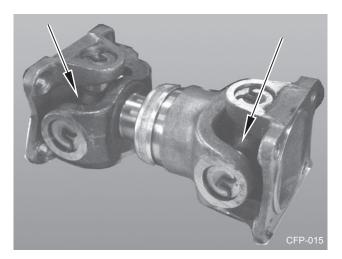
Drive Shaft Universal Joint Grease Fittings
